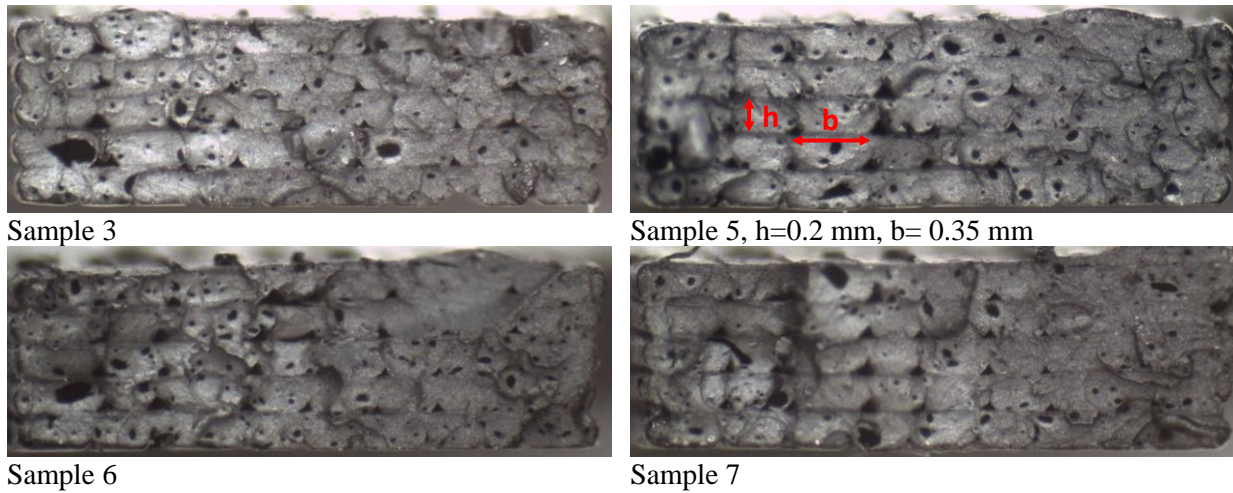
Fracture surface of printed tensile test samples, ABS/1 wt% CNT
